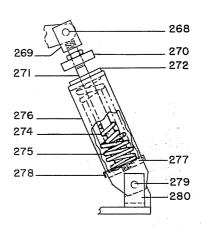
B Complete Spring Assembly (Ref. No. 273)
